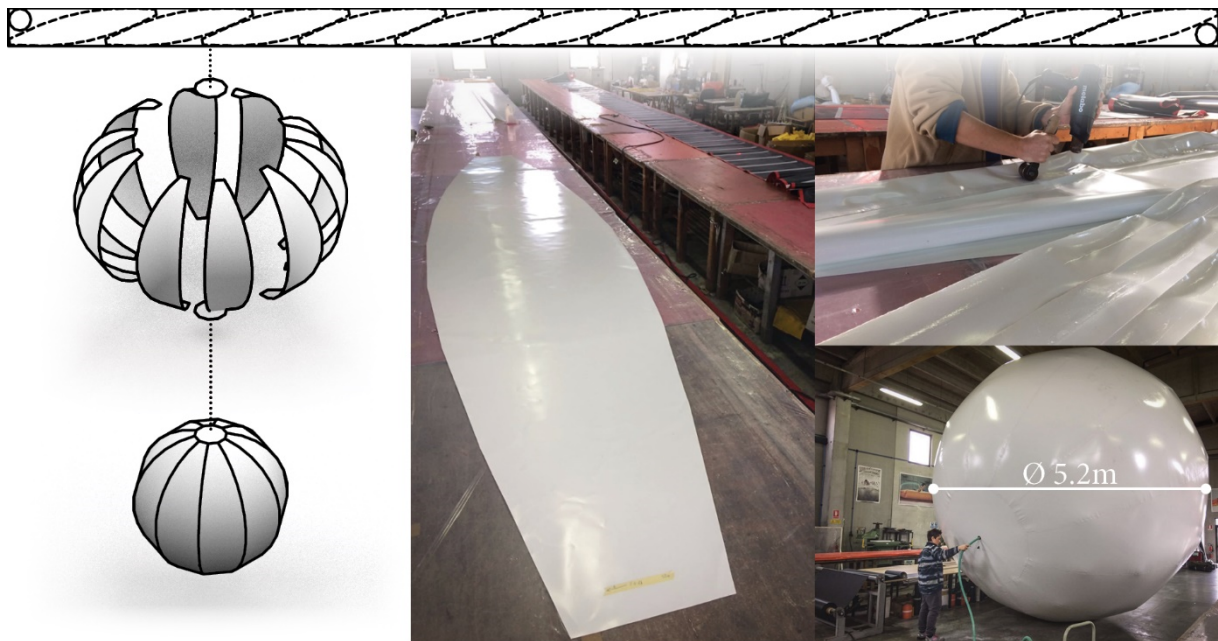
The membrane was virtually discretised into equal slices and unrolled for manufacturing – so that the flat patches could be cut and welded together; swelling test at the bottom right. [Image: A. Liuti]
